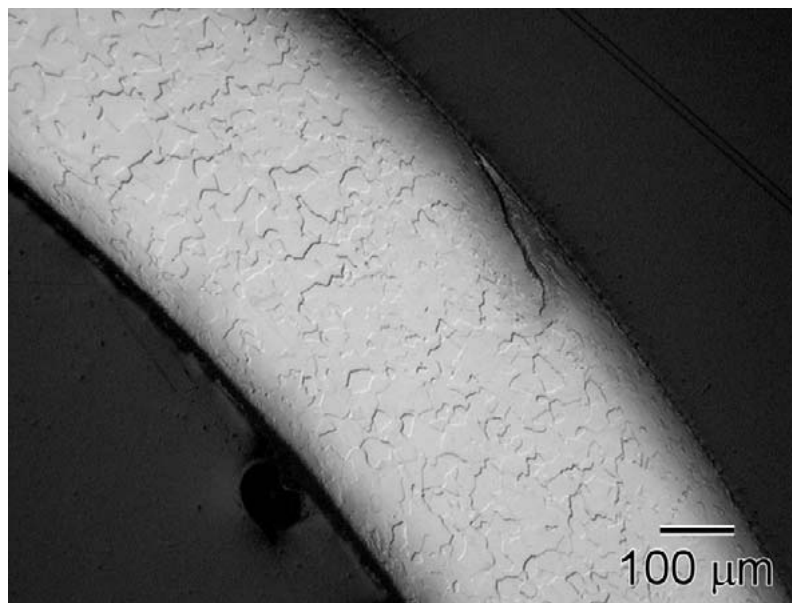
Surface defect in Tubing from US heat Batch B following the fifth drawing cycle.
